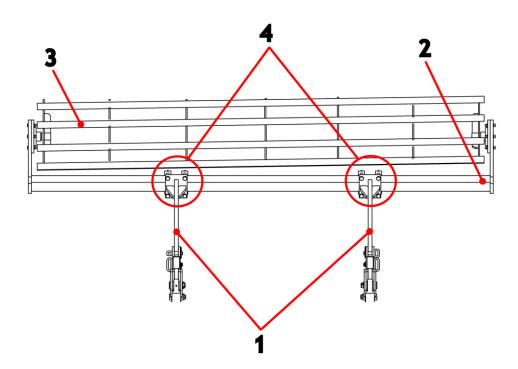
GAL-E arms connected to a tube-roller racket (1 - arms, 2 - tube-roller bracket, 3 - tube-roller, 4 - points of attachment of arms to bracket)
